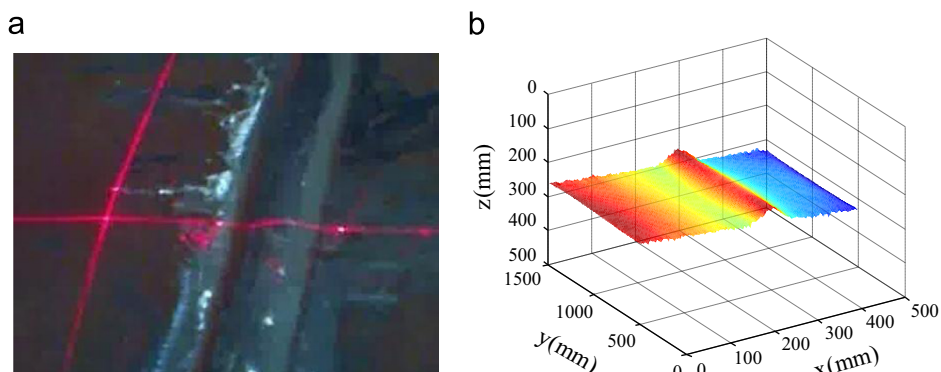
(a) Straight weld line detection of uneven lighting and weld defects. (b) 3D coordinates of a weld line section.
